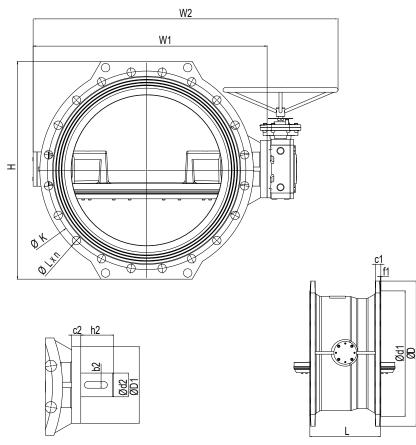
Sectional drawing PN 10 DN 100 - 1100
